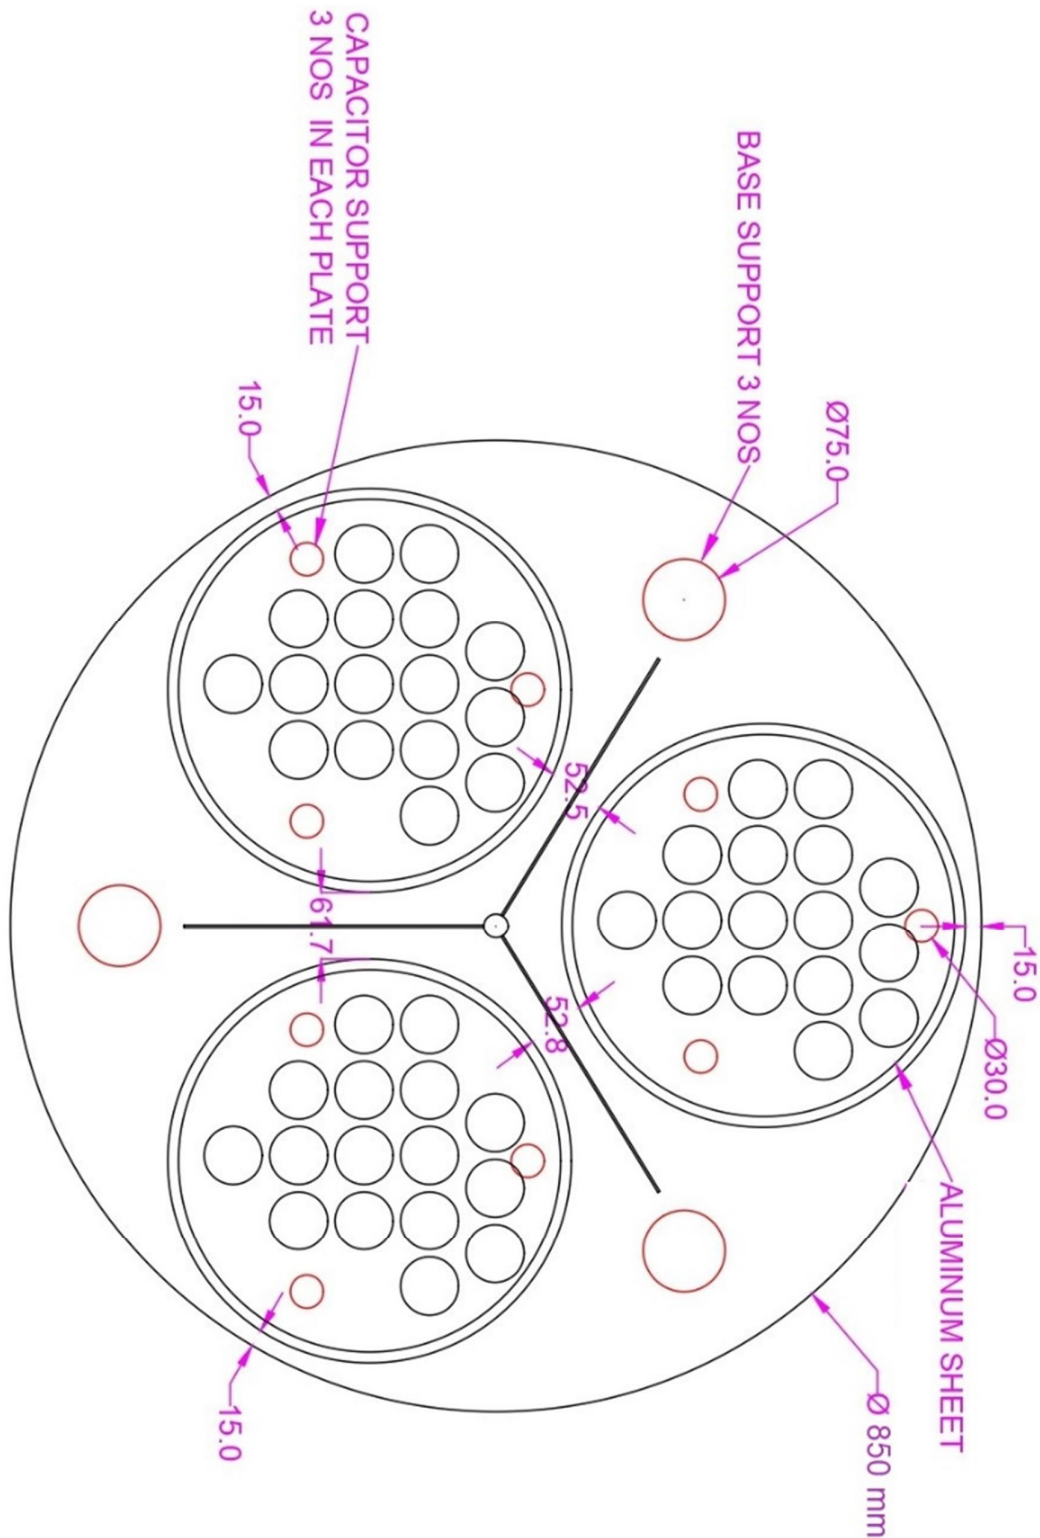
Mounting of HV Capacitor & other assembly on 850mm Sheet
